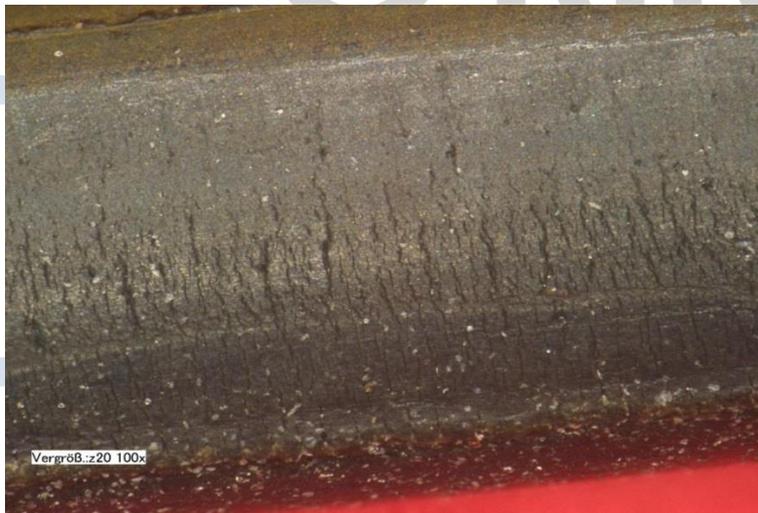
Cracks due to aging due to heat and oxygen under slight elongation can be seen on the contact surface of an O-ring
